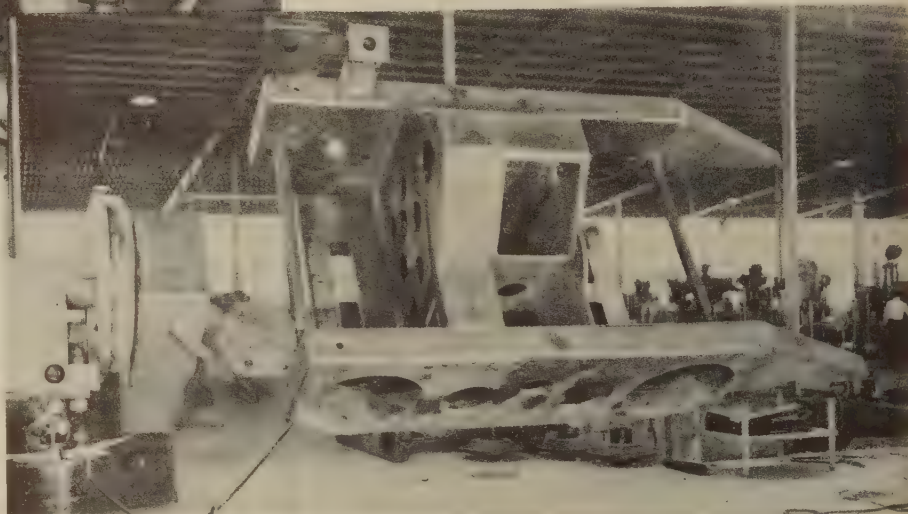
This 144 in. boring mill is one of the many special machines for building experimental machines or special production tools.
